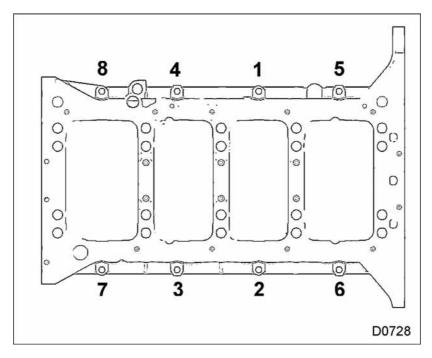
Torque sequence for outer lower crankcase bolts – 2004 Model Year
